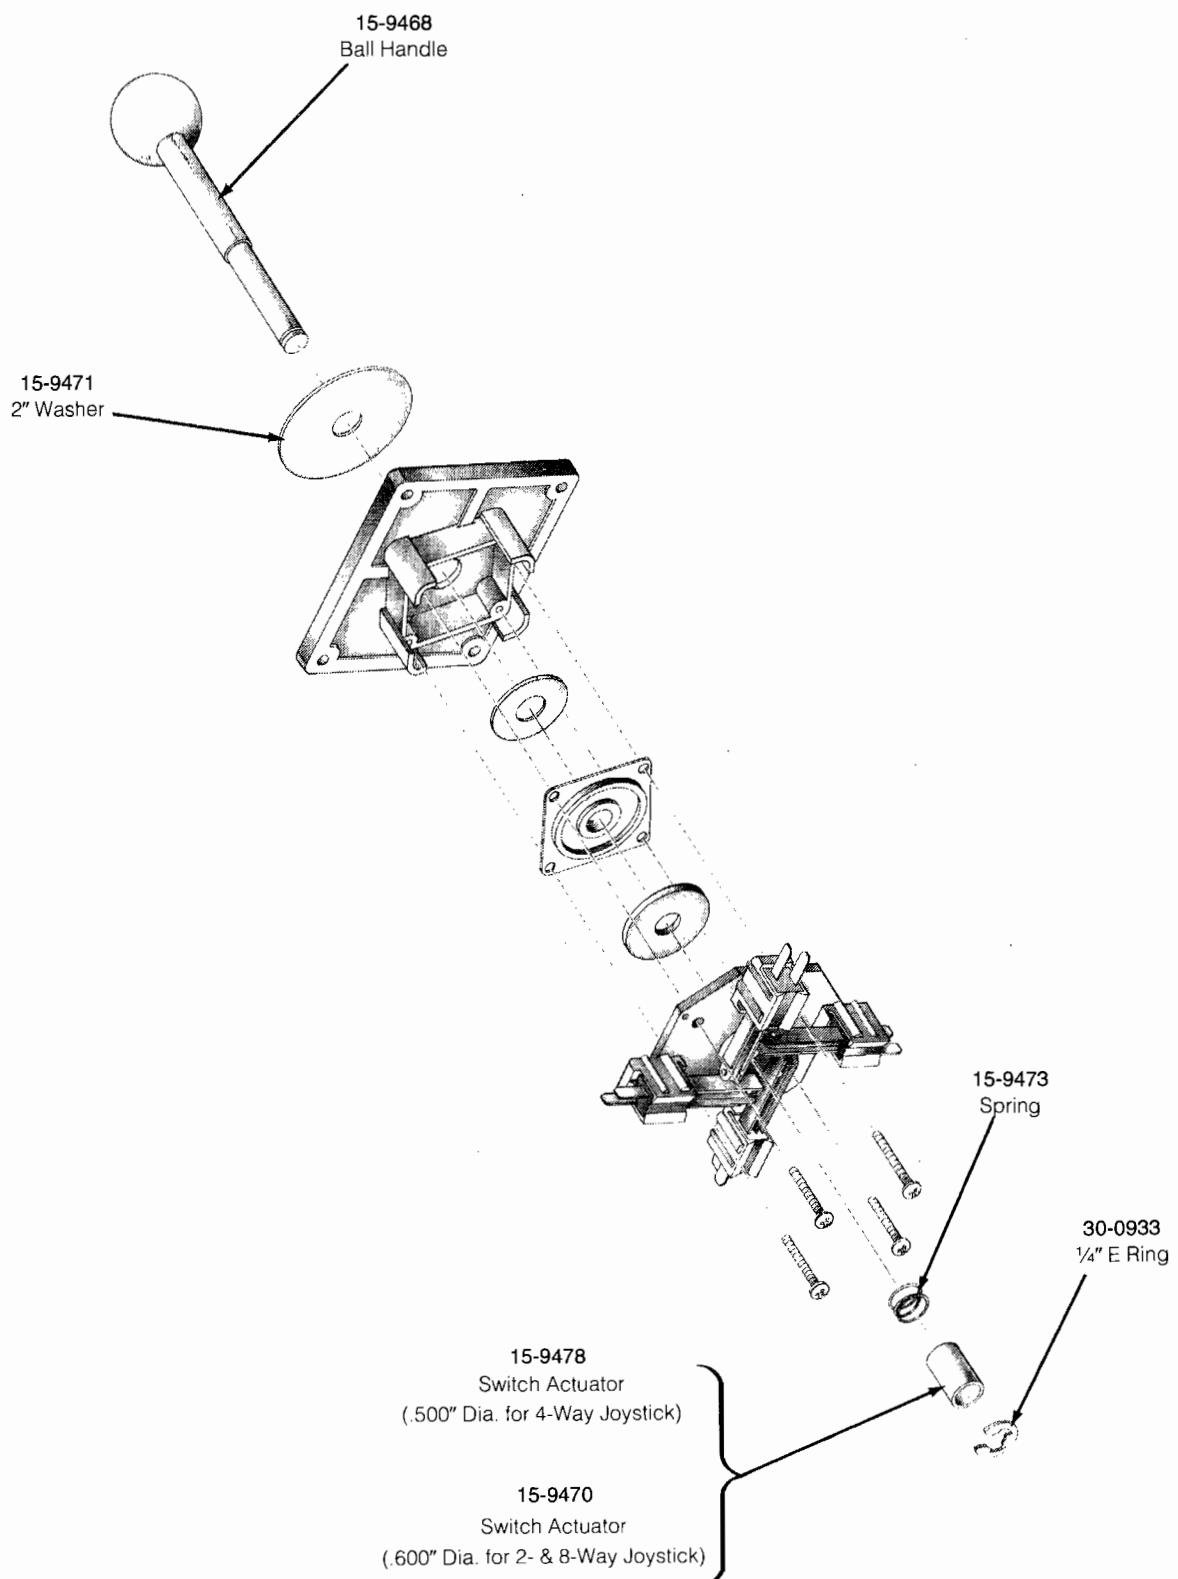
Wico Joystick Assembly (700-0163-01)
